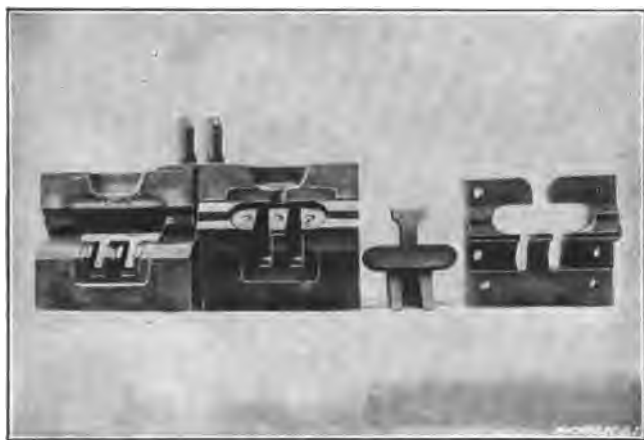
Lock Dies for Forging and Trimming a Special Hinge
